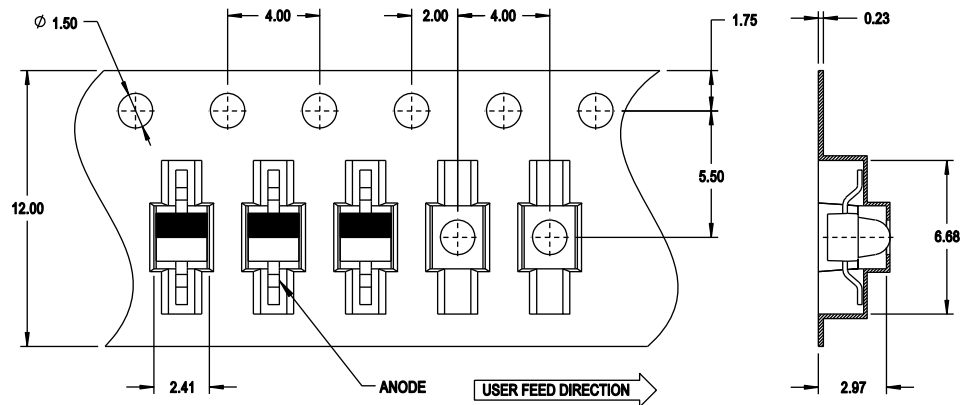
Carrier Tape Dimensions for Gull-Wing Lead
